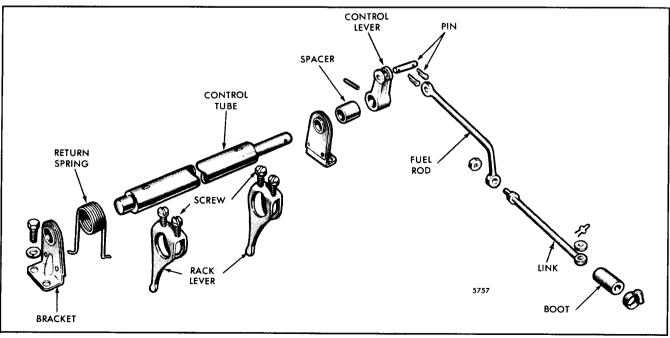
Injector Control Tube Assembly (Non-Spring Loaded - V Engine)
